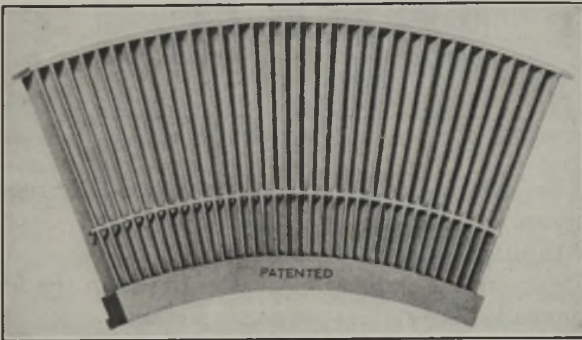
Segment of spindle blading for Allis-Chalmers Parsons turbine.
